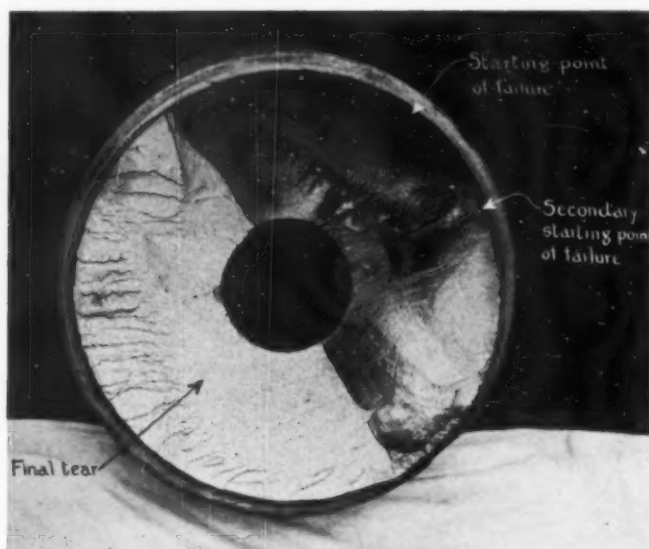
Showing failure of a crankshaft of about 20 in. diameter.
